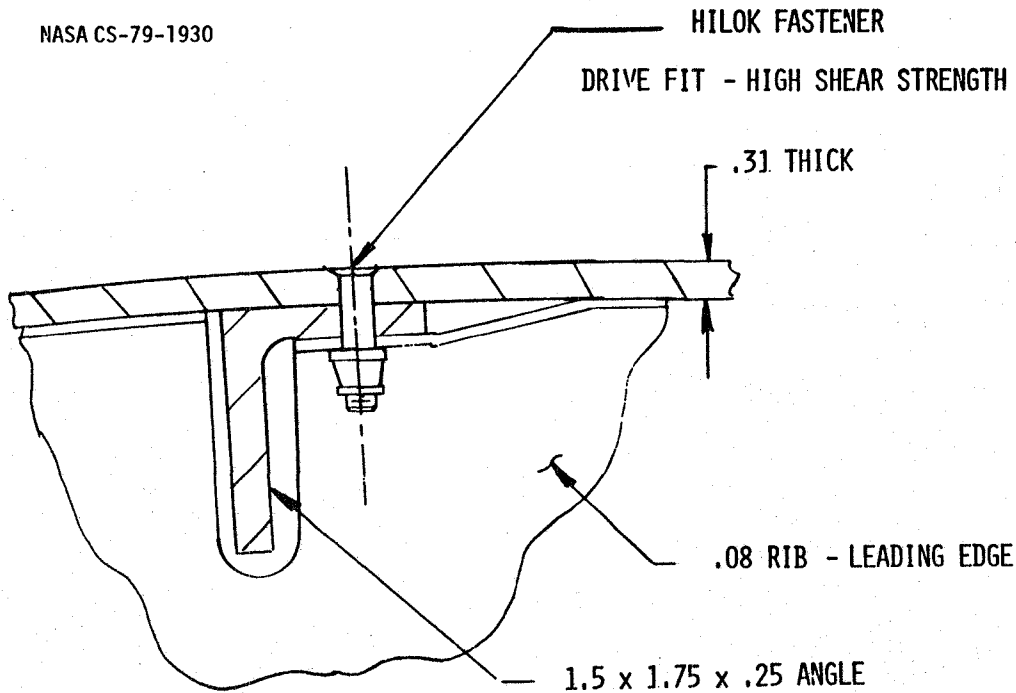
MOD-OA Blade Fastener Detail A
